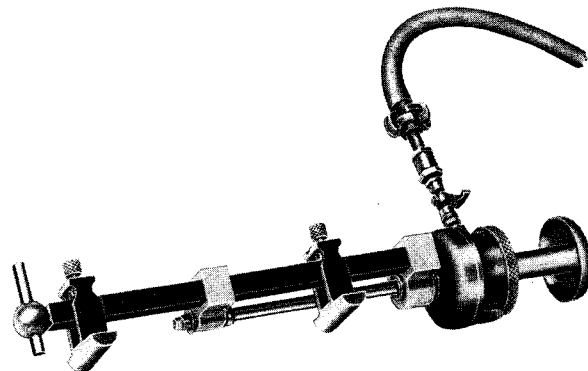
SMALL PORTABLE TOOL FOR UNDERCUTTING MICA. ATTACHED TO AIR MOTOR
